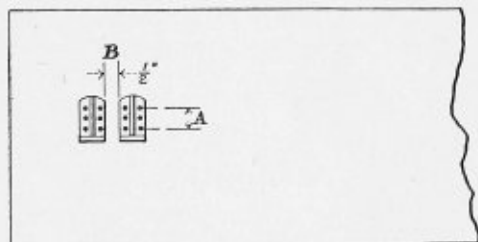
Spacing of Supporting Lugs in Pairs on Horizontal Return Tubular Boilers
